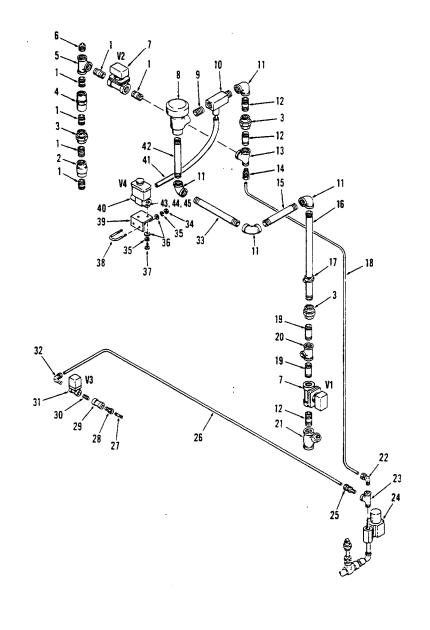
PIPING ASSEMBLY (Part 2 of 3).
